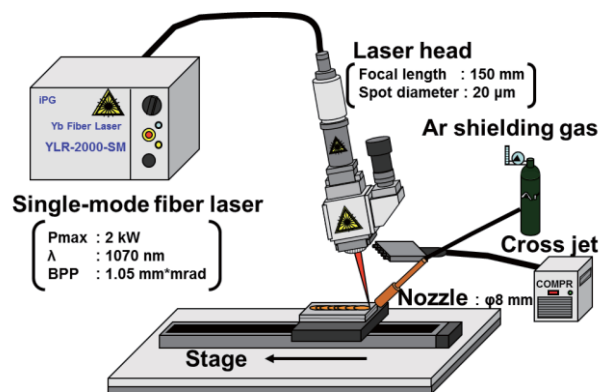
Schematic experimental setup for welding of Ti and Al dissimilar metals with single-mode fiber laser.
